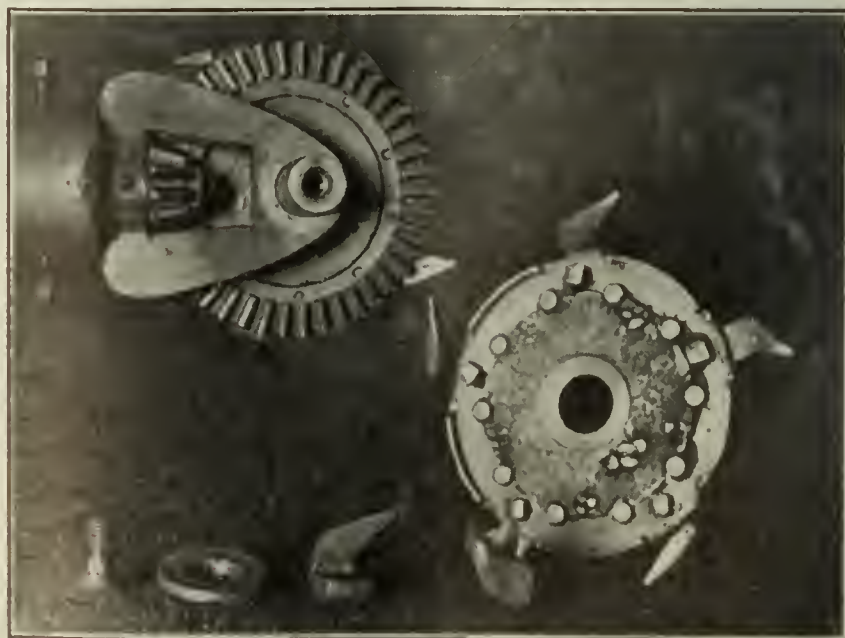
CUTTER DISK AND CONNECTION TO SHAFT
